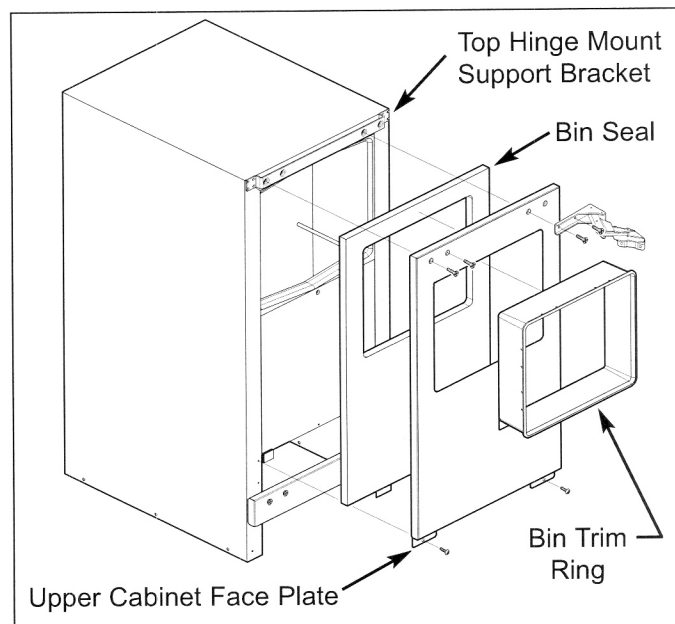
Bin Trim Ring, Upper Cabinet Face Plate and Bin Seal Removal
